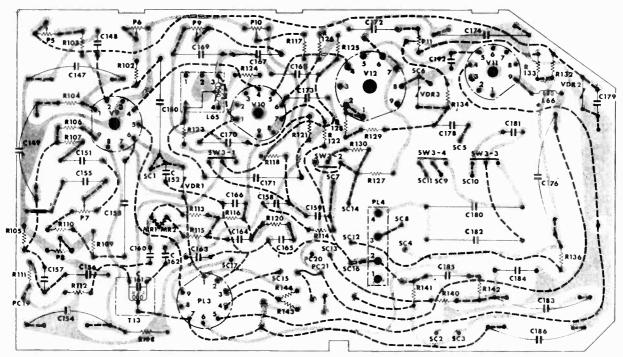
Layout of the timebase printed board viewed from the tin-dip side.
